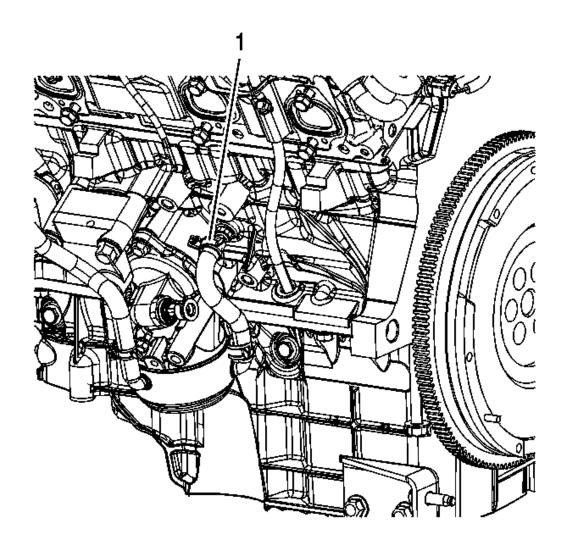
Locating Upper Inlet Hose Clamp Courtesy of GENERAL MOTORS CORP.
